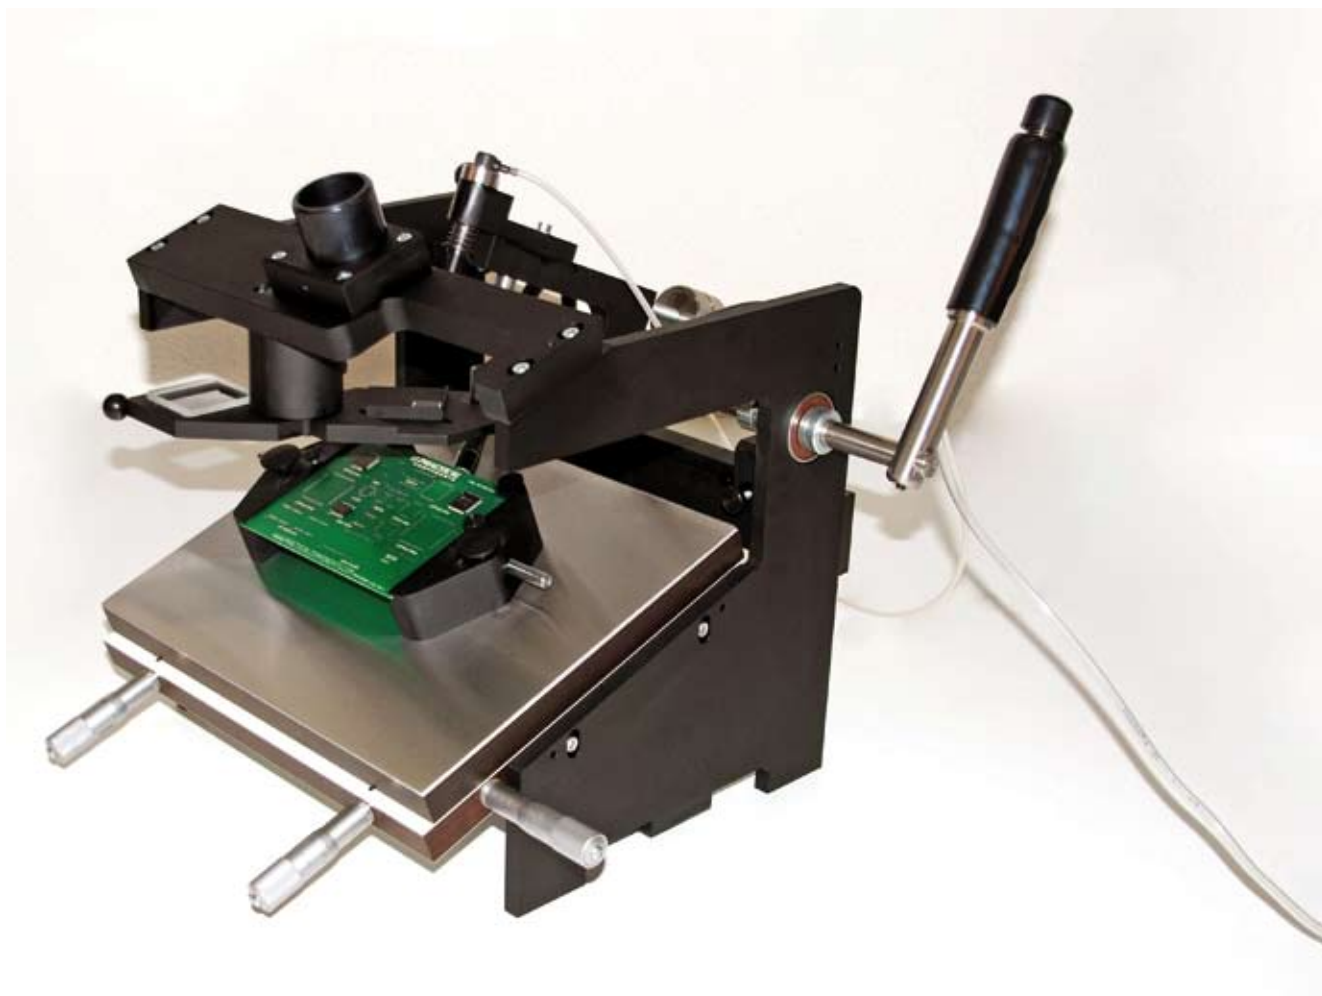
Current version of the Matchmaker. (Photo: Technoprint)
